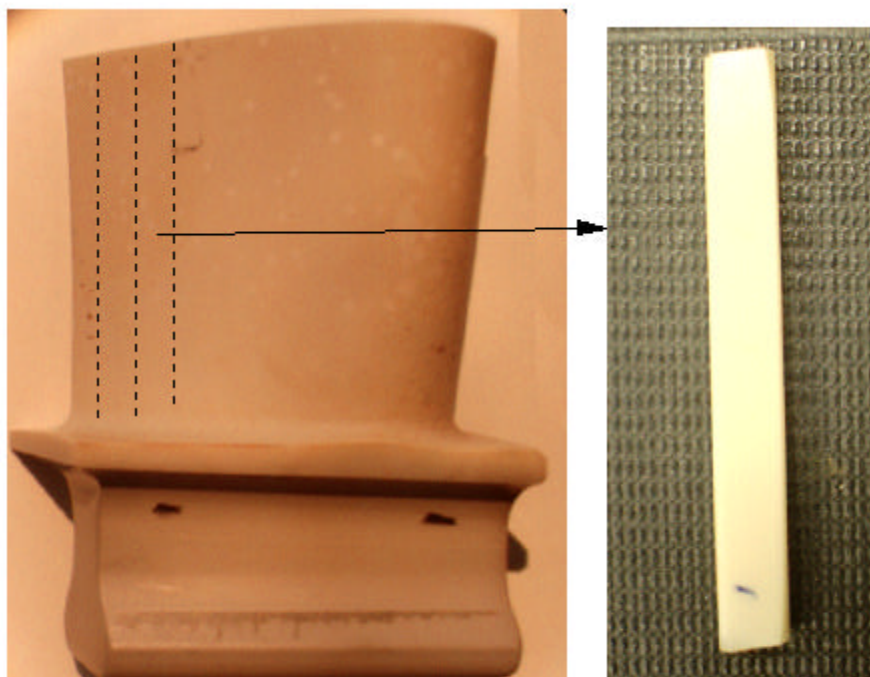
Macroscopic View of Post-Test Blade (AS800 S96096 03)
